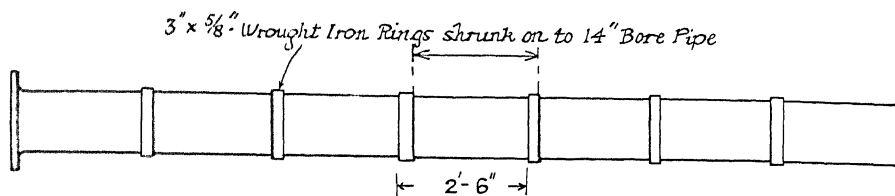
Method of Reinforcing Welded Steam-pipes
